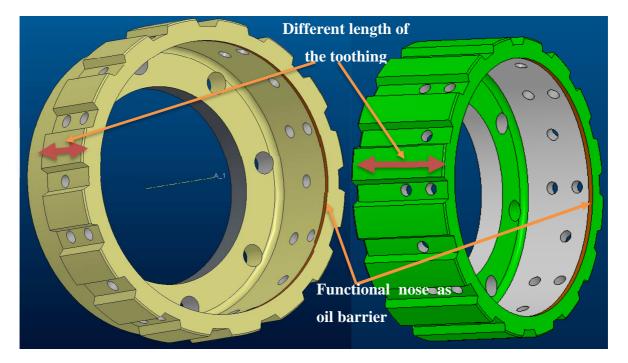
Original inner disc carrier (left) and modified sinter inner disc carrier (right)
